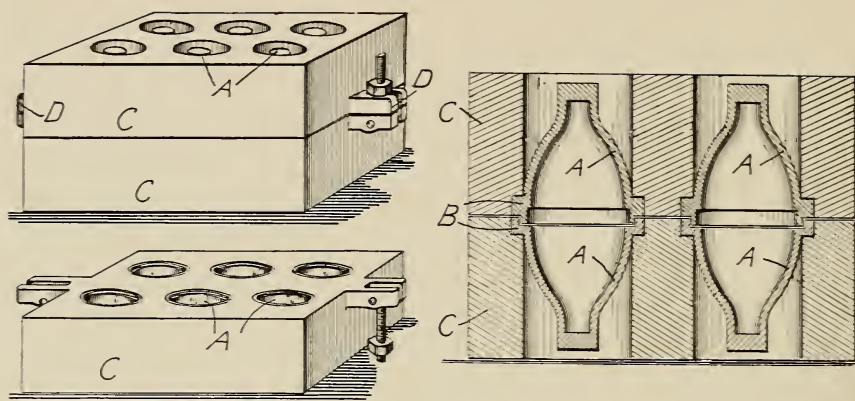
THE EGGERS QUICK CURING MOLD WITH SOLID CAST IRON FRAME.
